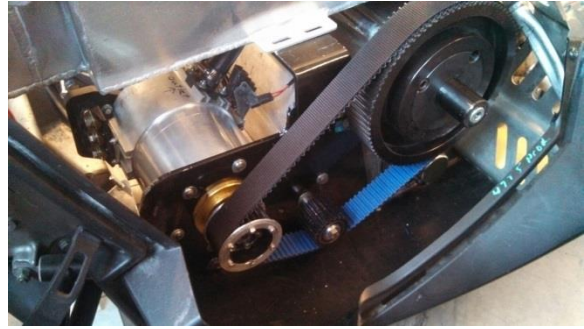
Belt drive from the motor to the jackshaft. Gear ratio is 3:1 (jackshaft : motor)
